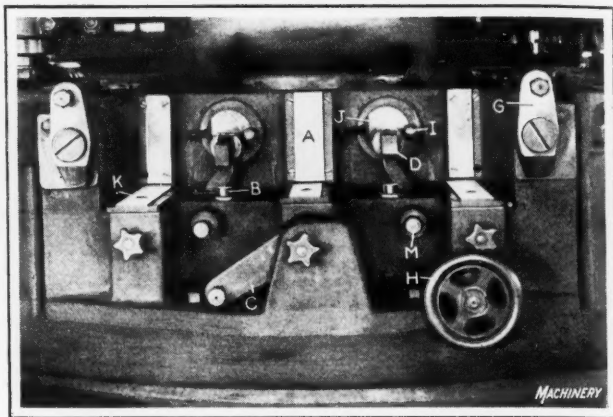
Fixture employed in milling the Port and Plate Sides of the Cylinder Block
